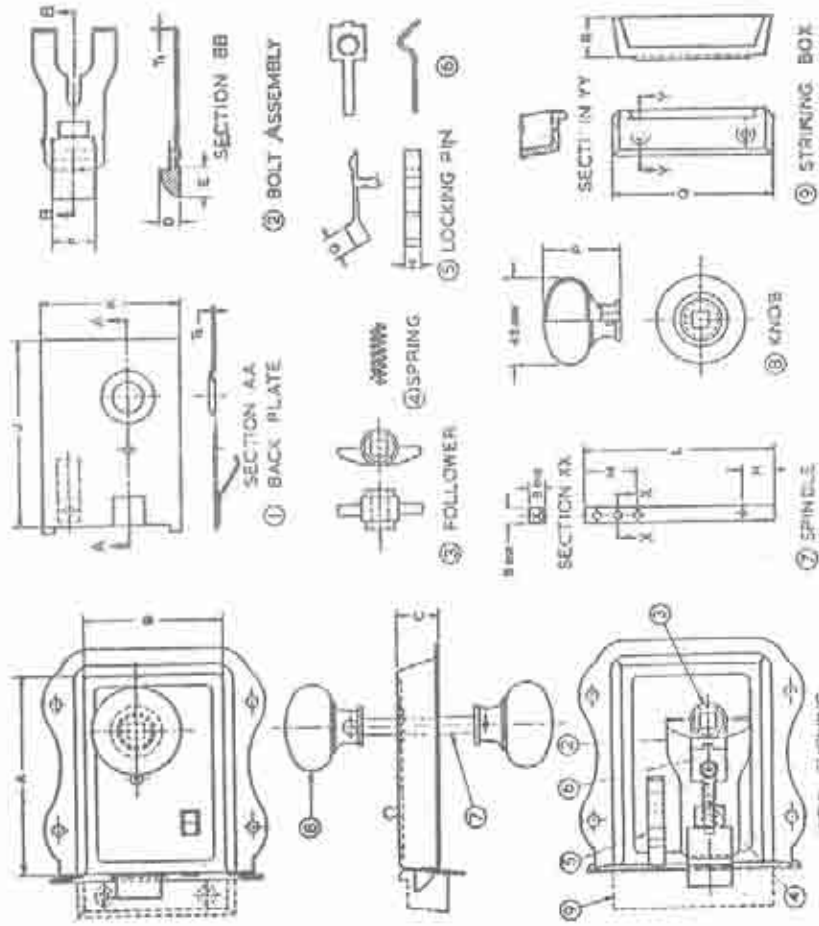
TYPICAL DESIGN OF RM LATCH - Type 2
